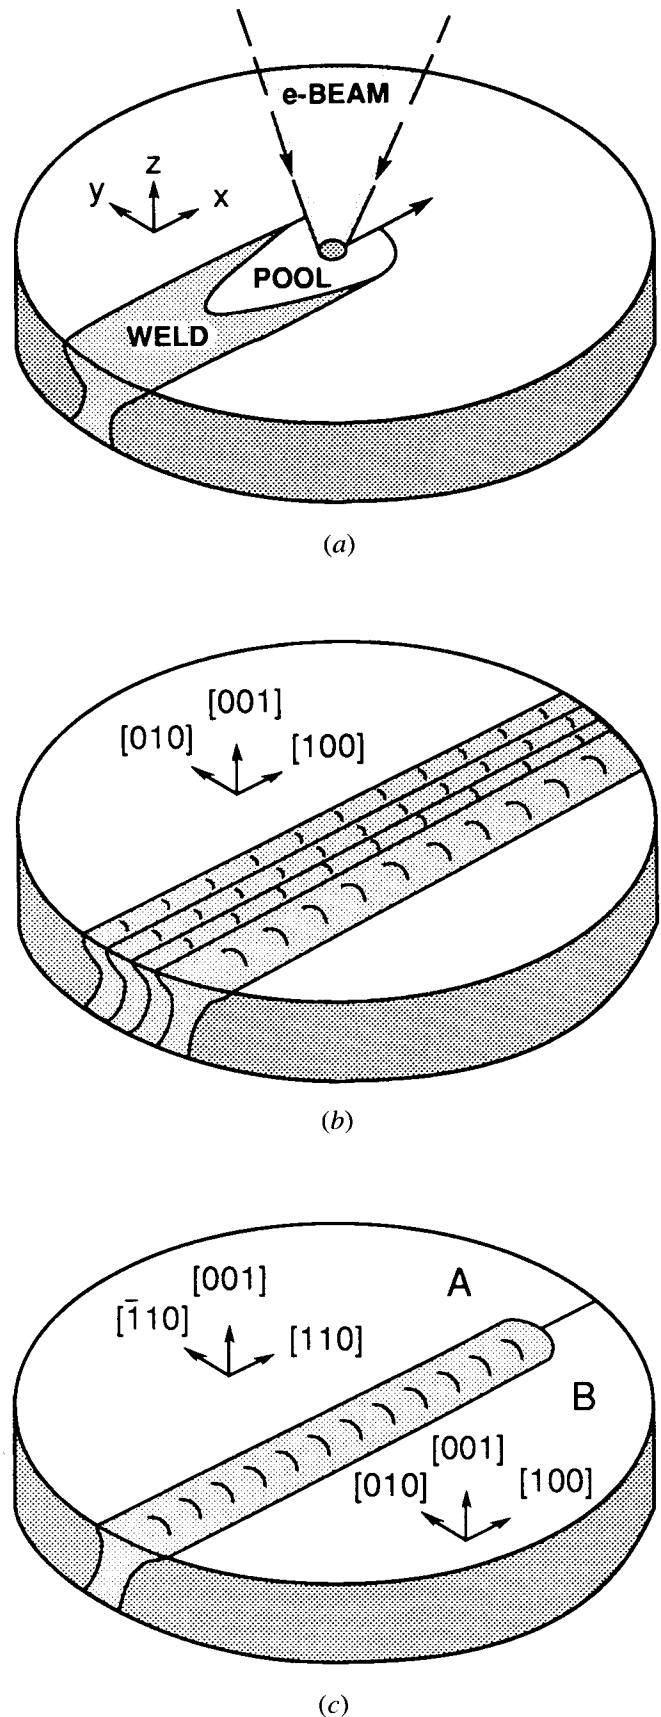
Welding configurations used in the present study: (a) autogenous single-pass single-crystal weld, (b) autogenous multi-pass single-crystal weld, and (c) autogenous bicrystal weld.
